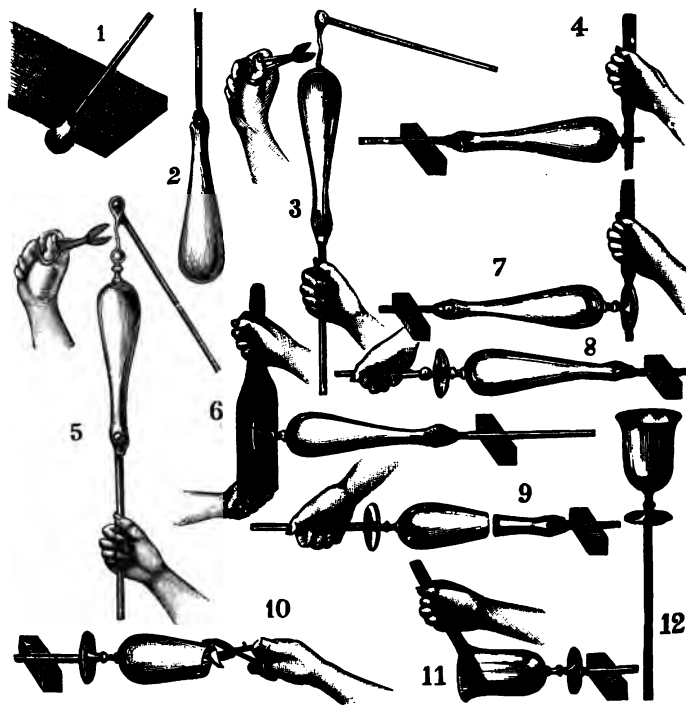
Making a goblet. 1, pellet of glass on blowpipe; 2, after having been blown; 3, 5, pieces welded on for base; 4, 6, 7, 8, finishing base; 9, 10, cutting off top; 11, finishing top; 12, complete goblet.
